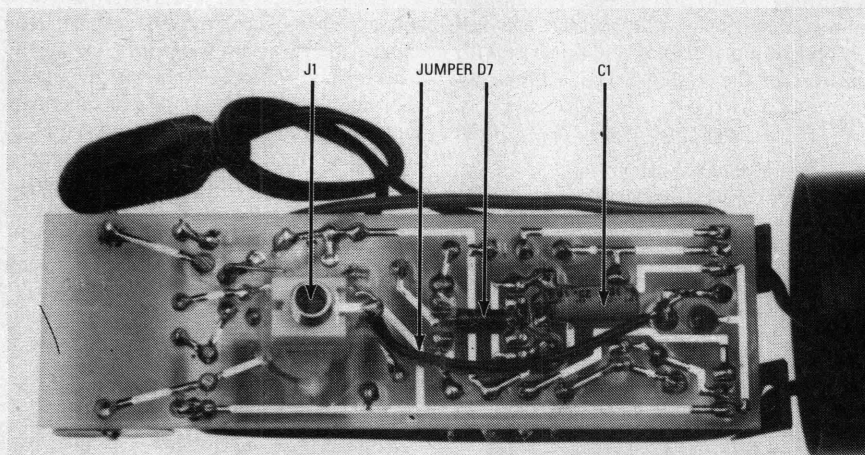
JACK J1, DIODE D7, AND CAPACITOR C1 mount on the foil side of the PC board. One terminal of J1 mounts to the same pad as R8, and the jack should be glued to the board with RTV (or other high-voltage compound) after you verify that the circuit works properly.
